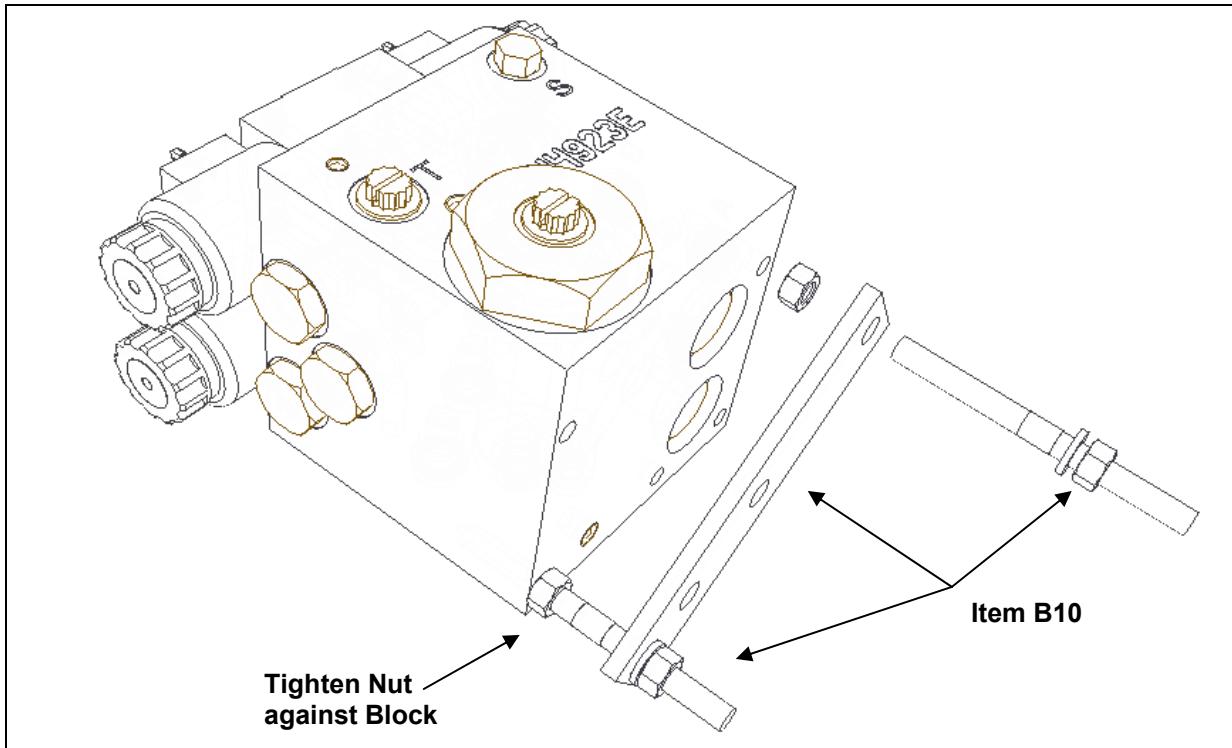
NORAC Valve Block Mounting Hardware for HPZ/HAZ Install
